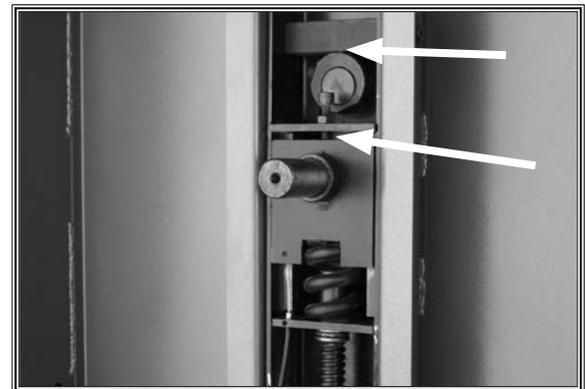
Tension adjustment assembly locations (top wheel removed for clarity).
